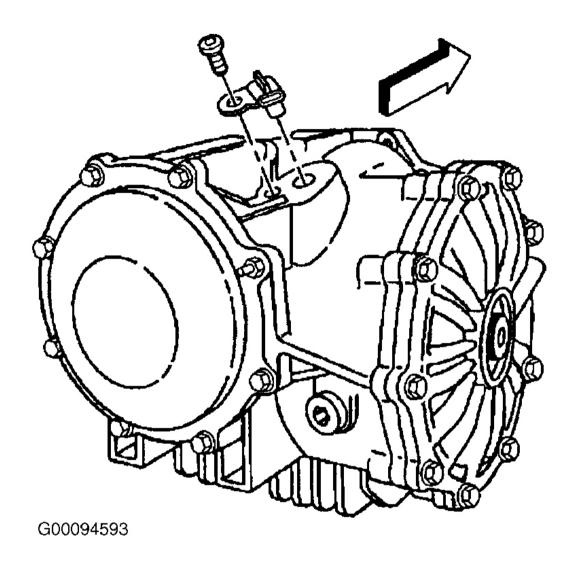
Removing & Installing Vehicle Speed Sensor Courtesy of GENERAL MOTORS CORP.
